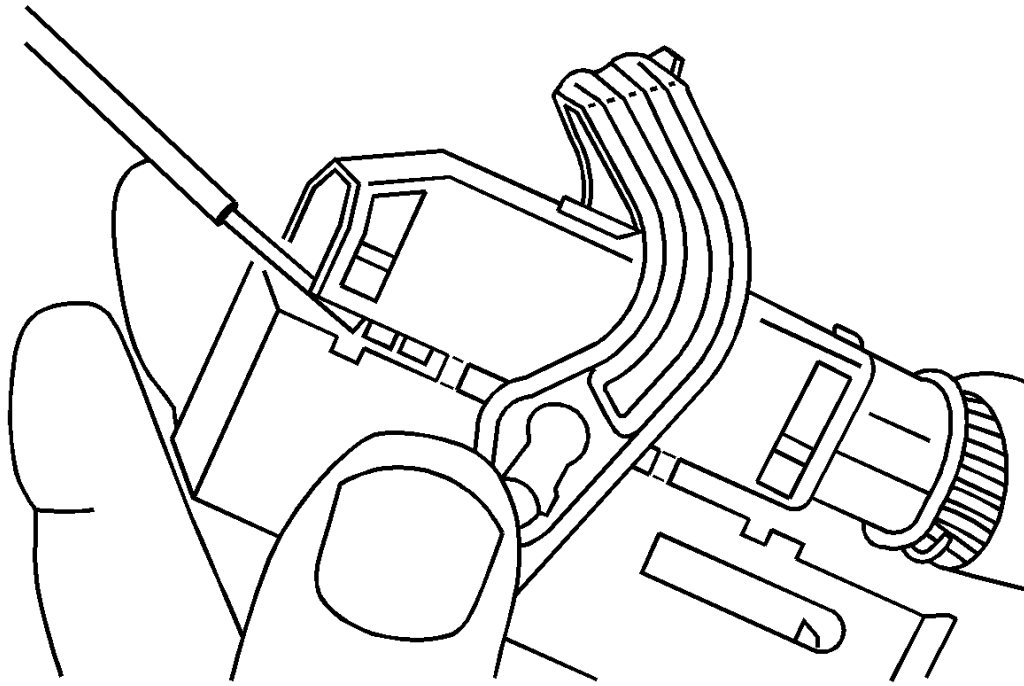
View Of Flat-Bladed Tool Between Cover & Connector End
